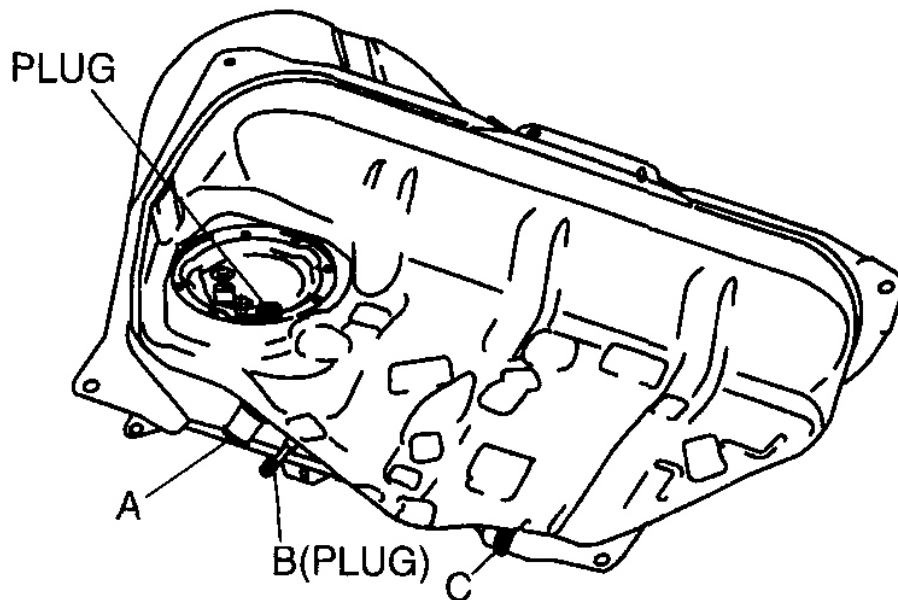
Identifying Plug Fuel Pump Unit Pipe & Ports
